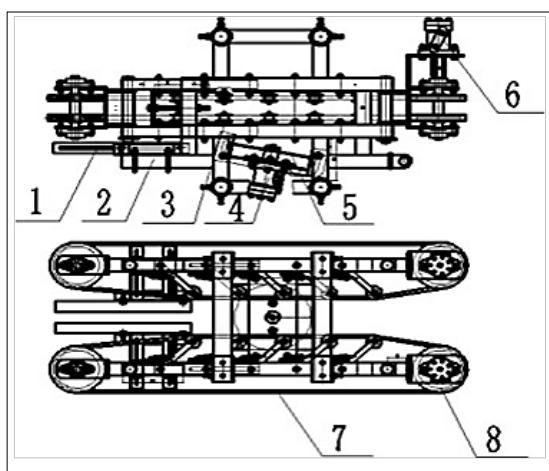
1 Extraction shovel; 2 frame; 3 tension guide wheel; 4 DC motor; 5 cutting blade; 6 pulley drive hydraulic motor; 7 belt; 8 pulley (Cao *et al.* (2022) ^[29])
